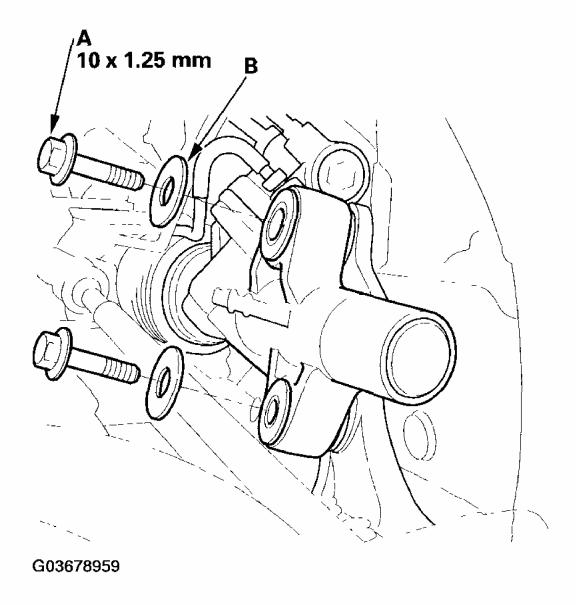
Removing Two 10 Mm Flange Bolts And Washers From Left Side Of Gearbox
